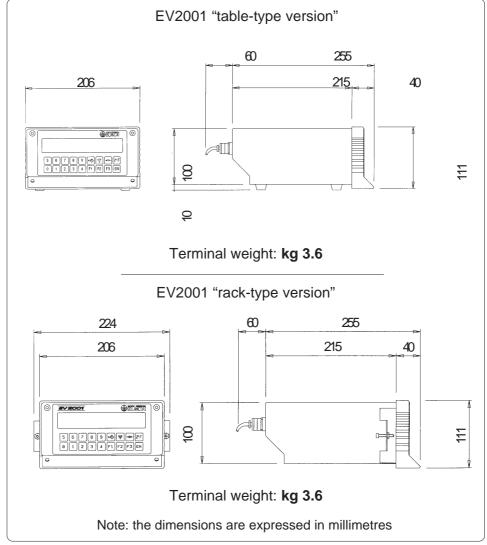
dimensions and weight of table-type and rack-type EV2001 -65-
